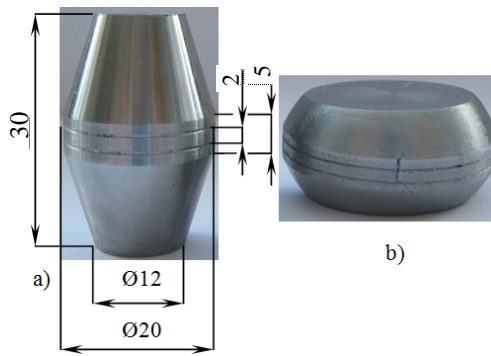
Upsetting of tapered specimen: a) initial specimen, b) specimen after forming [2, 8]
